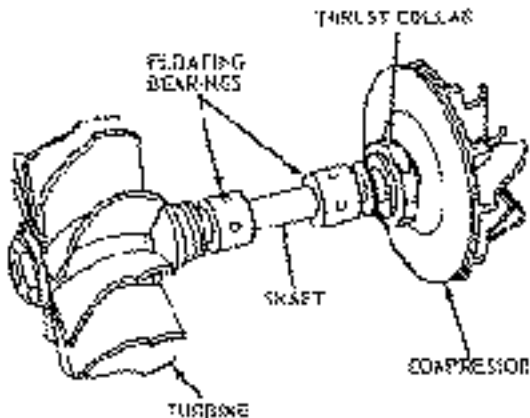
Rotating parts of a turbocharger. (Courtesy of Deere and Company.)
